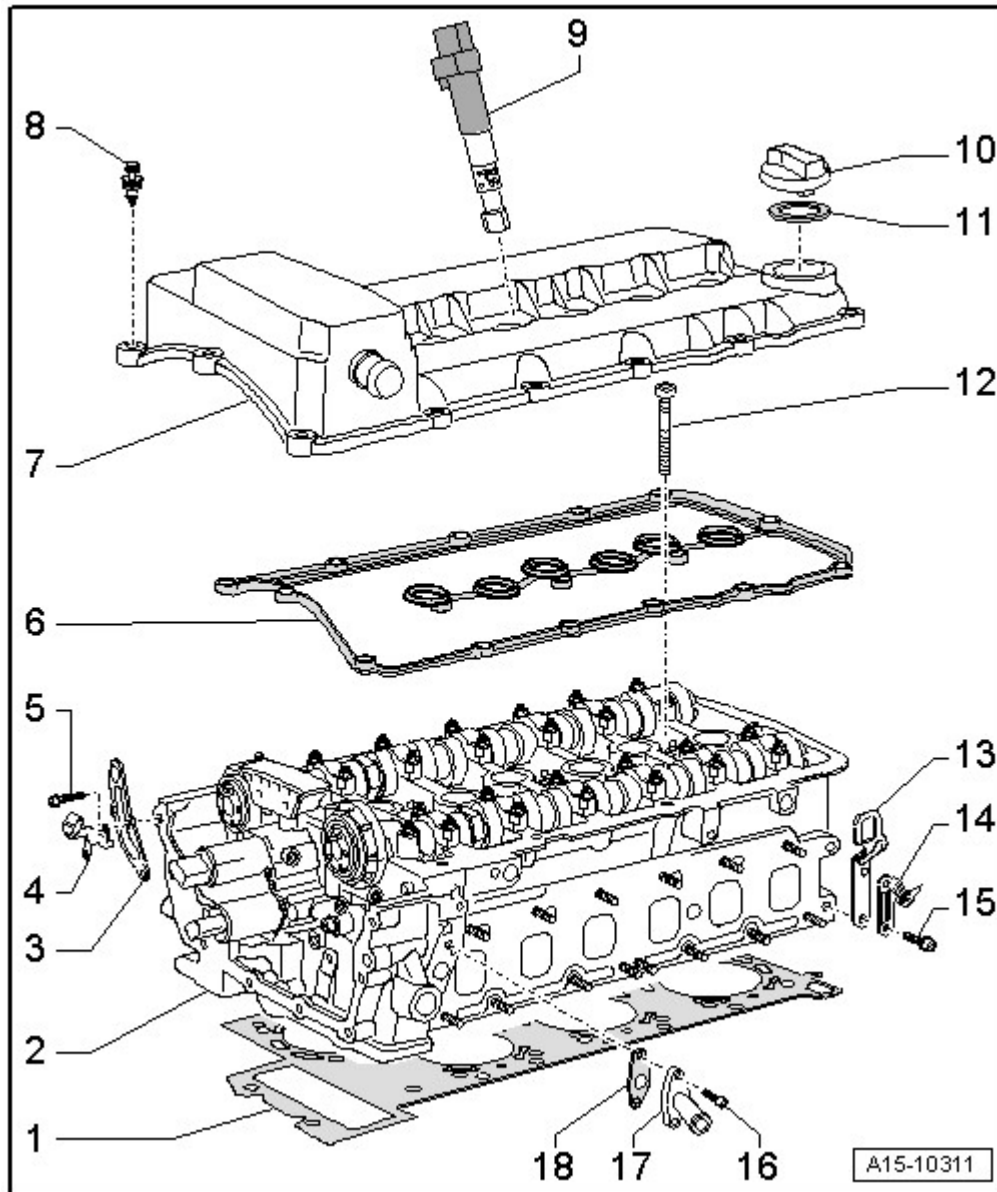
Identifying Cylinder Head And Cover, Assembly Overview
